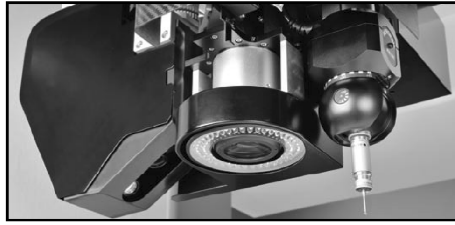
Multi-sensor head [6] with a laser scanner (left) and a touch probe (right)
